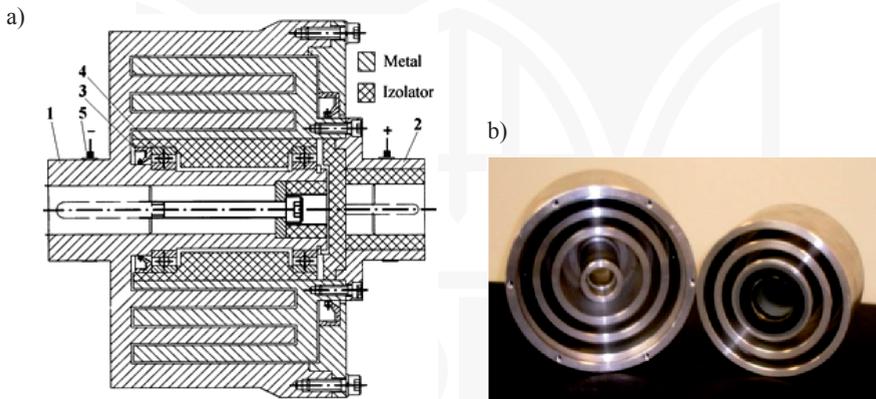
Scheme of the cylinder viscous brake design; a) cross-section: 1 – driven element of the brake, 2 – a stationary brake part 3 – sealing ring 4 – ball bearing 5 – commutator rings; b) general view
